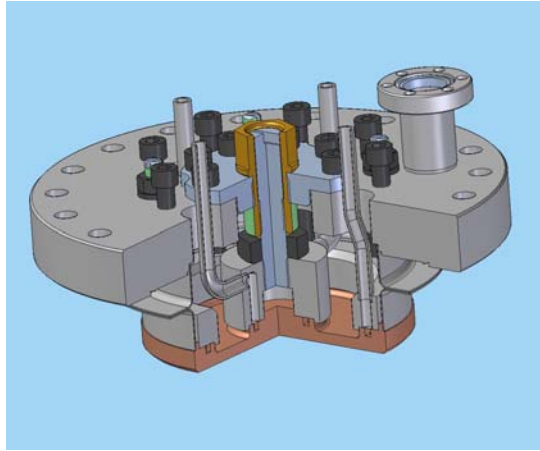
Cutaway drawing showing the details of the cathode assembly.
